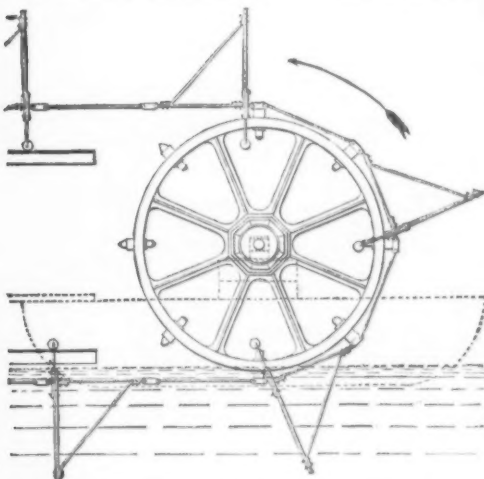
DETAILS OF WHEEL AND CHAIN.
